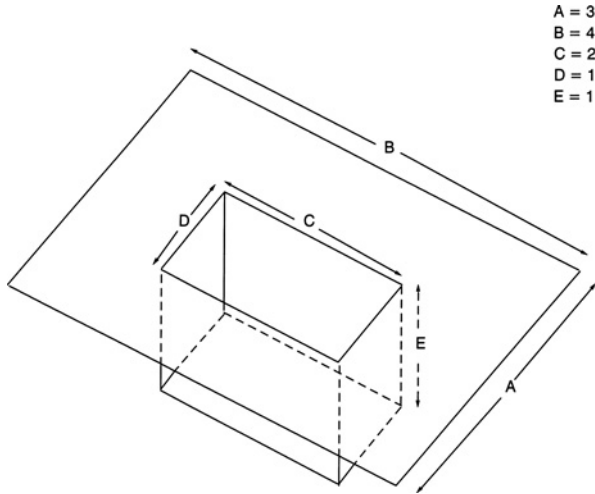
Relative dimensions of a container generated from a thermoformed sheet using a female mold. Before forming, the area of the section to be formed is 2 units. After forming, the surface area of the box is 8 units.
